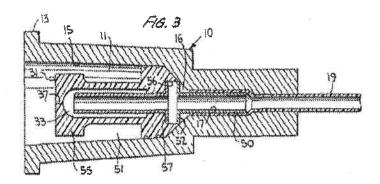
of Vaillancourt '766 depicts a sectional view of a catheter assembly having a valve member 55 with an outwardly extending annular flange 52 that engages the wall in chamber section 16 in an interference fit (Vaillancourt '766, col. 3, 11. 32-33 and col. 6, 11. 51-68).
